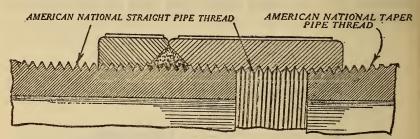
Illustration of "long screw" joint between straight threaded coupling and taper threaded pipe
